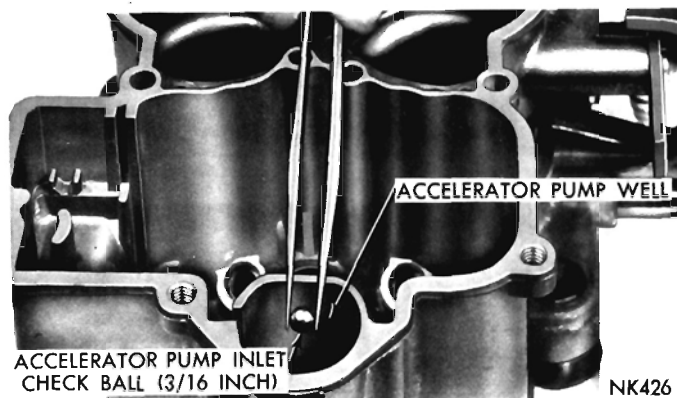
Installing Accelerator Pump Inlet Check Ball
